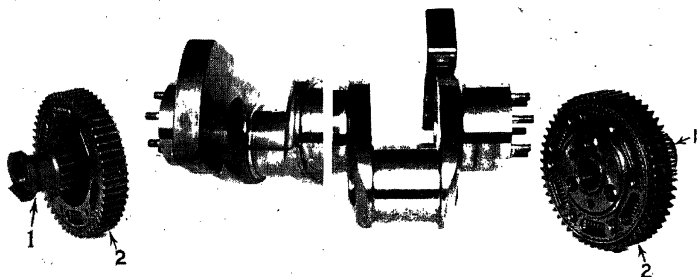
Macrostructure of Mercedes-Benz D.B. 601A reduction gear pinion on forward end of crankshaft.
